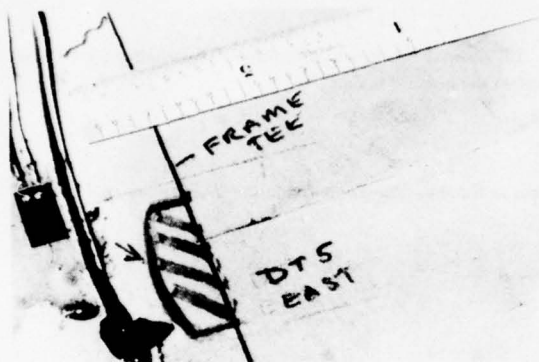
DT5 CRACK TIP - FRONT VIEW
